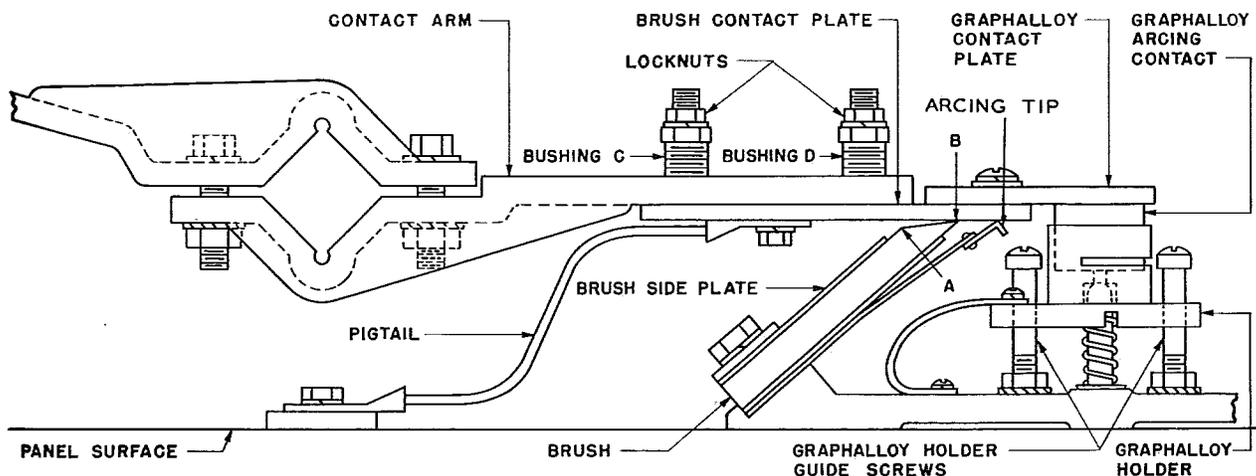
Contact Adjustment for Laminated-type Contacts and Graphalloy Arcing Contacts
